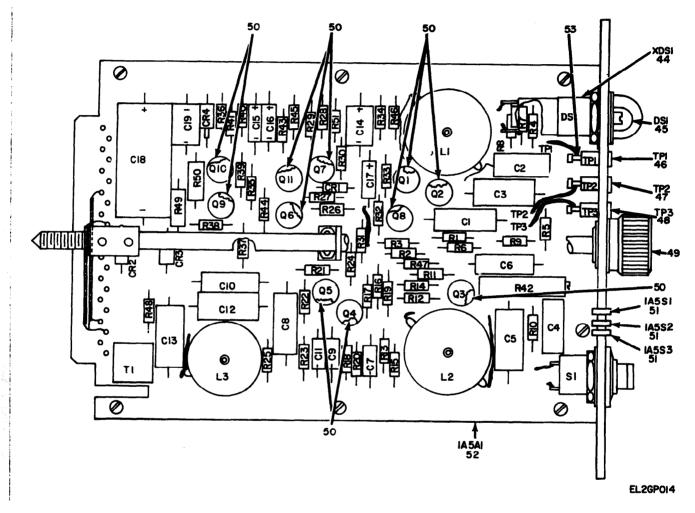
Ring Receive Module Assembly 1A5, Ring Receive Subassembly 1A5A1.
